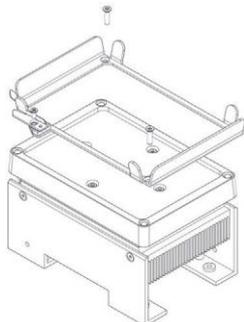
Assemble the outer frame of flat bottom adapter with 2 screws.
